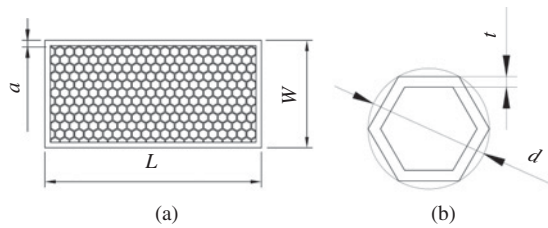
Top view of one piece of the microchannel plates with regular hexagonal honeycombs. (a) Single layer. (b) One honeycomb hole.
